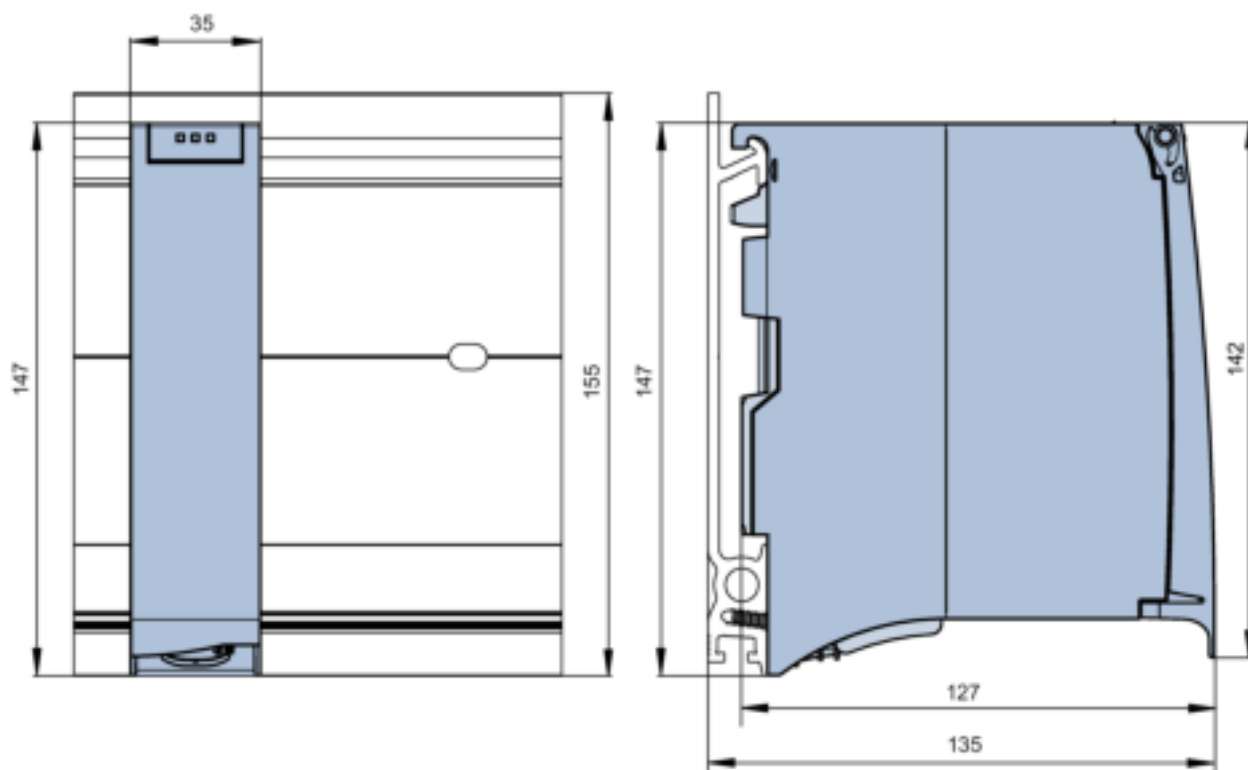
Dimensional drawing of the communications module CM PtP RS422/485 BA/HF with front and side view
